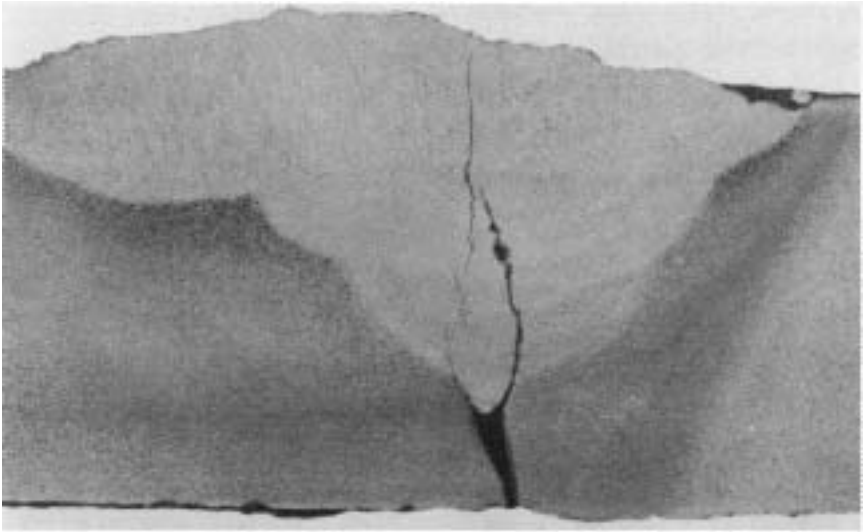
Lack of penetration in the root of a butt weld in a boiler feedwater line. Sodium hydroxide concentrating in the resulting crevice led to caustic stress-corrosion cracking. Note fine cracks emanating from crevice. (Reprinted with permission from Helmut Thielsch, Defects and Failures in Pressure Vessels and Piping, New York, Van Nostrand Reinhold, 1965.)
